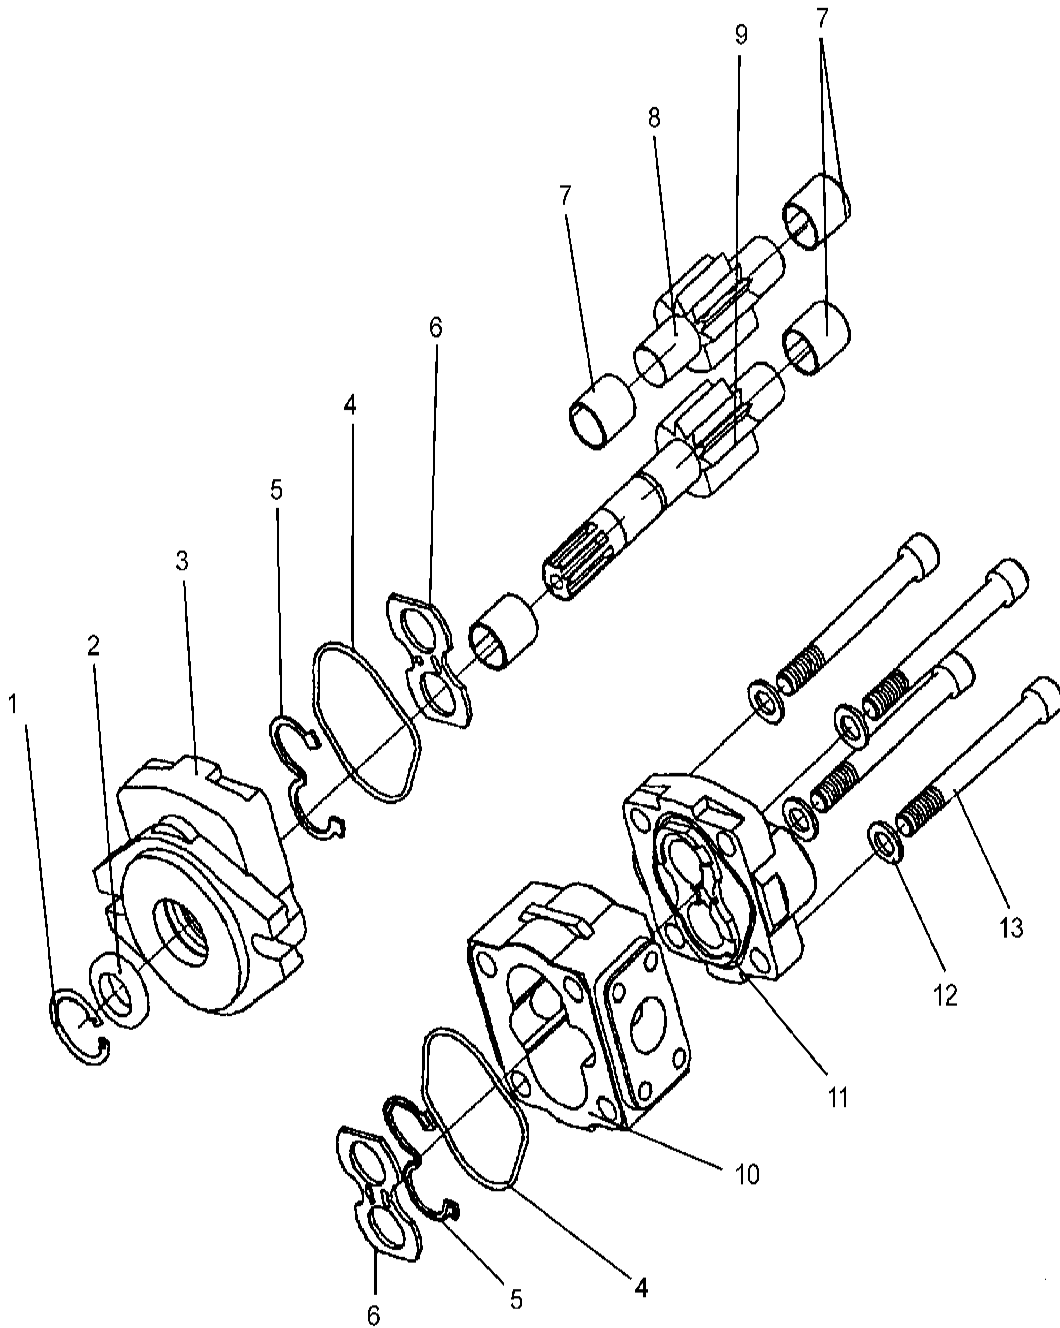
CBHZ(G) or SGP1 Rotate the gear pump clockwise (right)
